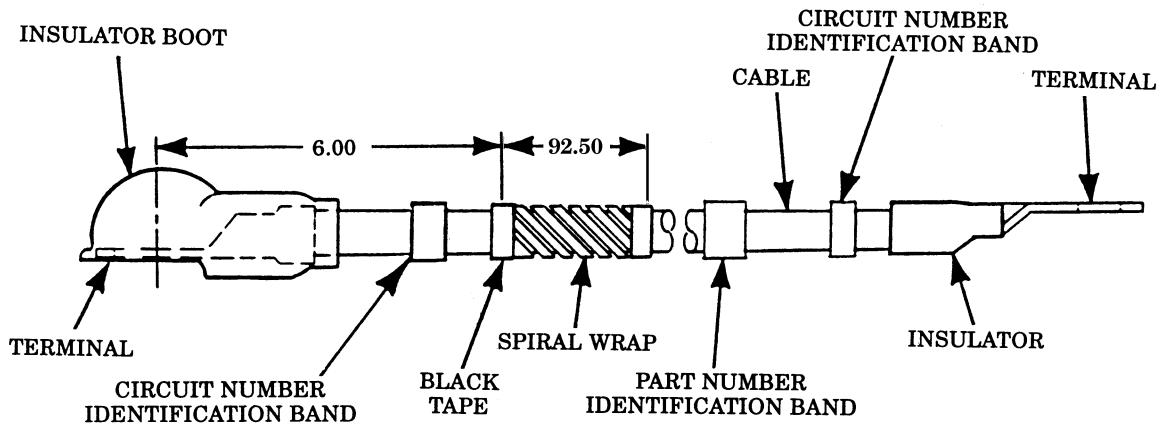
12 Volt Alternator Cable Assembly.
